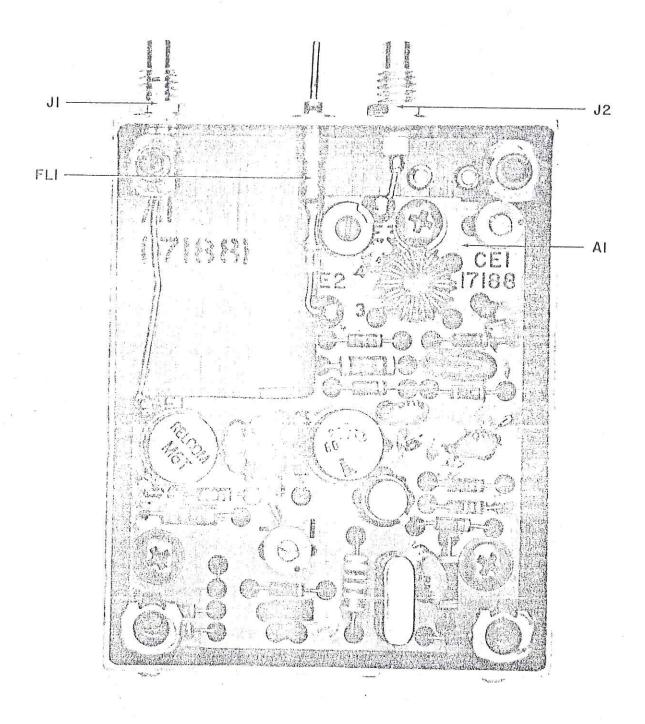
Type 791169 160/21.4 MHz Converter Assembly (A5), Location of Components.
